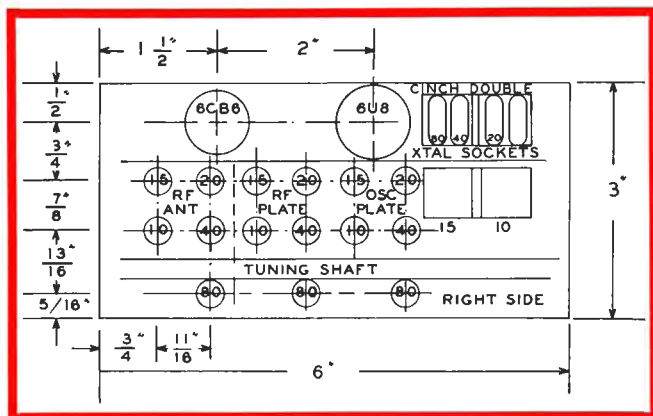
LAYOUT DIAGRAM for the converter subchassis on which the tube sockets, coils and crystal sockets are mounted. Holes not marked for location and size should be drilled to suit the components used. The subchassis has a $\frac{1}{2}$ -inch step between the coils and tube sockets.
